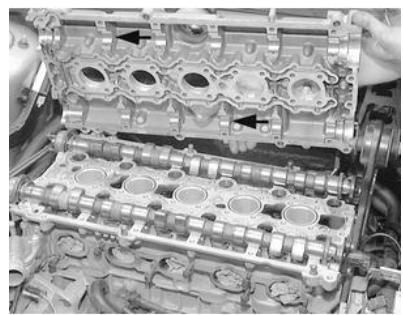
Carefully lift the upper cylinder head up and off the lower section. Note the integral camshaft bearing caps in the casting
